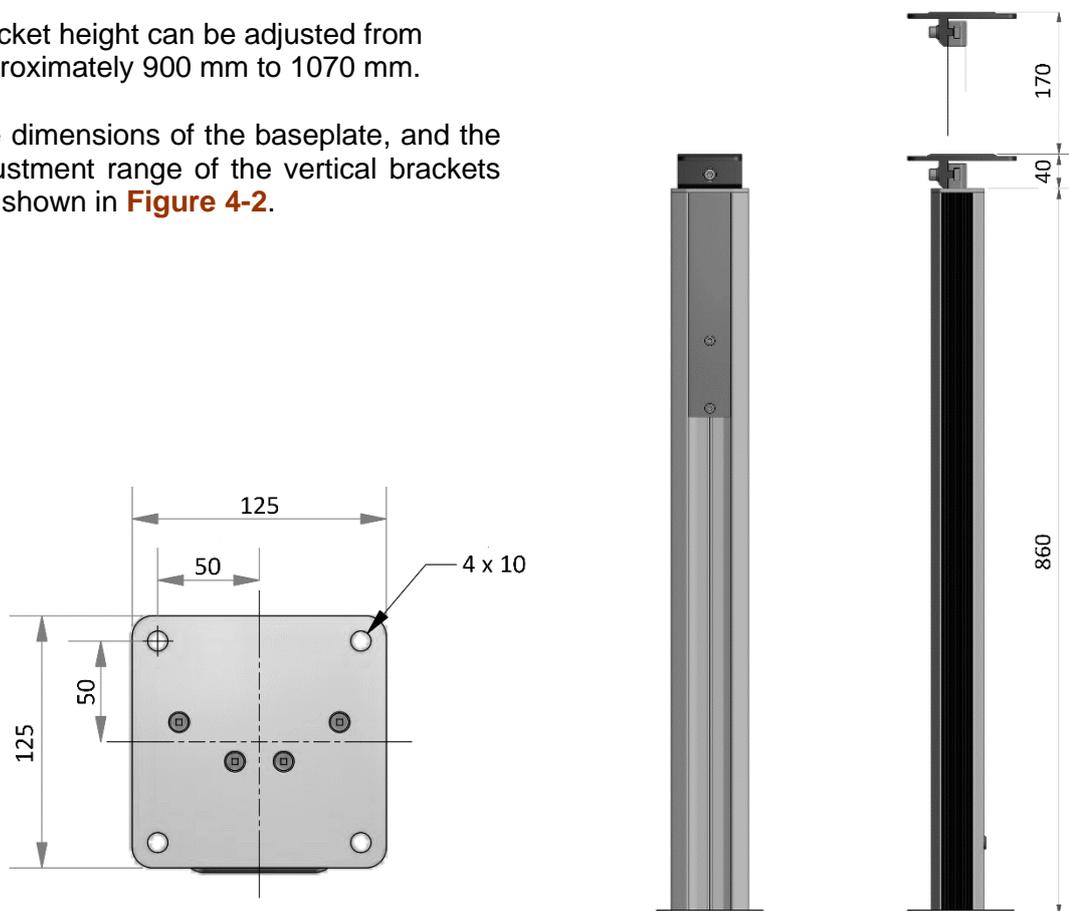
Mounting Bracket Dimensions (Millimetres)
